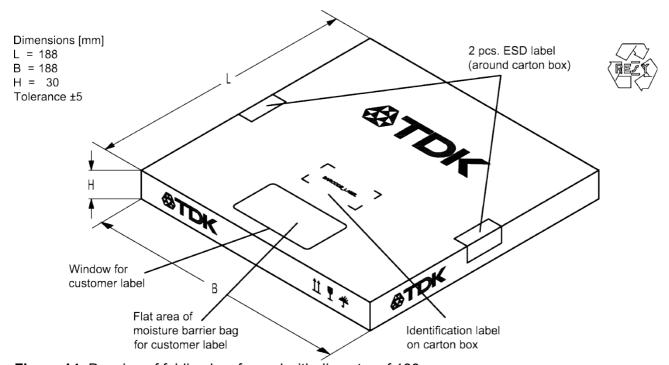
Drawing of folding box for reel with diameter of 180 mm.
